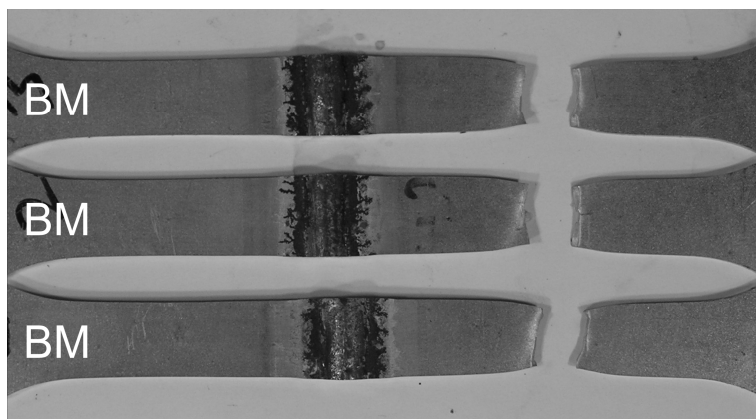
An example image showing the 100% BM failure location that was observed for all of the uniaxial transverse weld tensile specimens. This weld (TB116) was made the highest heat input weld parameters from Experimental Series 1 onto the 1.80 mm DP600 ‘24s’ sheet steel.
